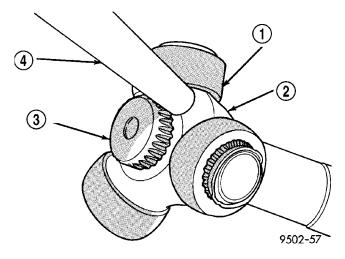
Installing Spider Assembly On Interconnecting Shaft
